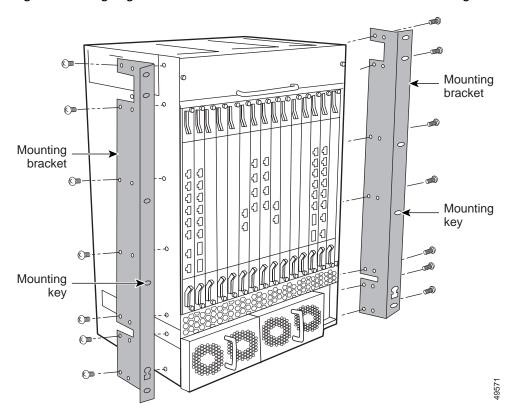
Screw Holes on the CSS 11800 Bracket for Front and Extended Mounting
